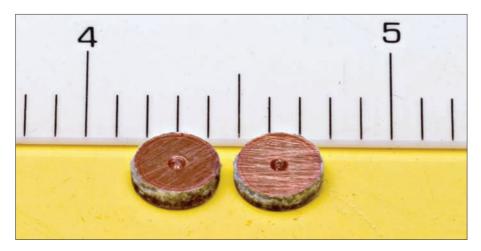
Examples of the resultant discs. In practice the can be either mounted on the copper side of p.c.b. material, or on the blank side (see text).
